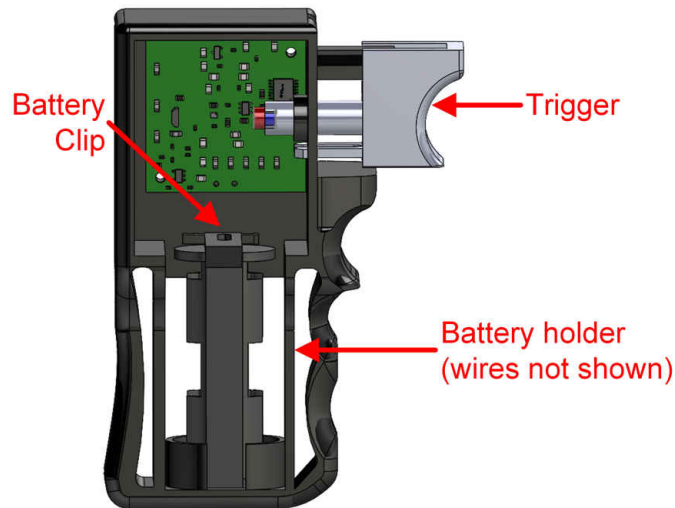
Front View With Battery Holder Inside Trigger Module
